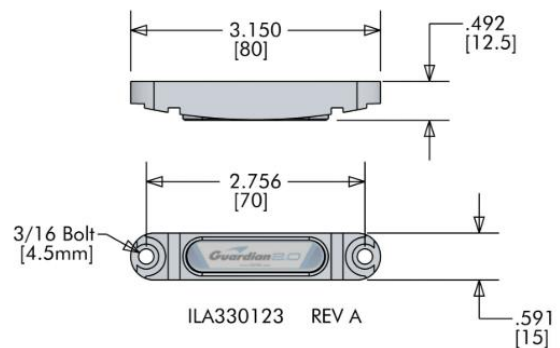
PALLET ID TAG MOUNTING DIMENSIONS
